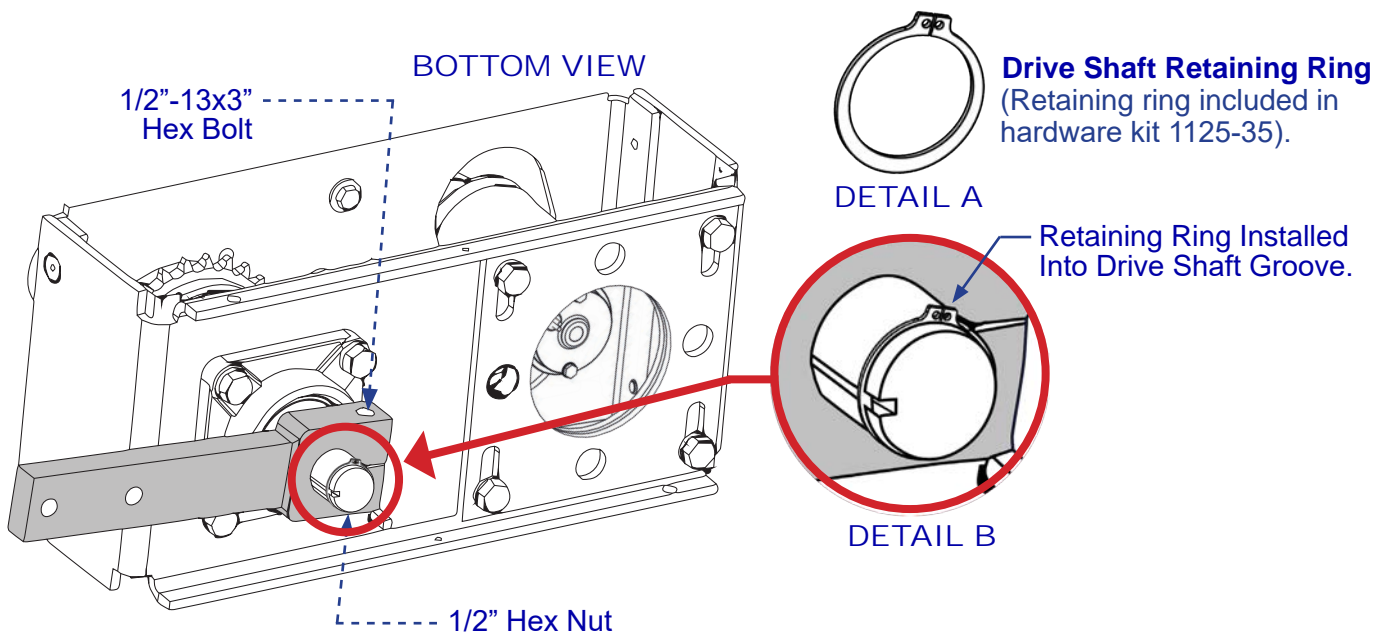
Primary Arm Collar Mounted To Main Drive Shaft
